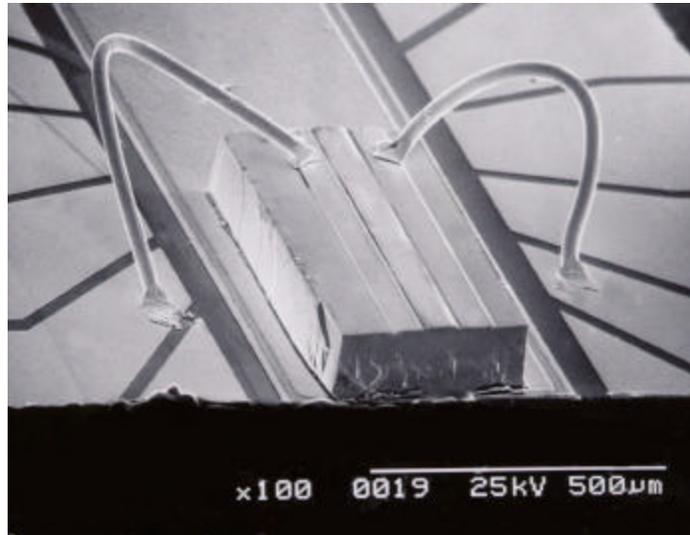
SEM of a processed and packaged ridge laser and monolithically integrated cooler. The laser was mounted at the edge of a cleaved Si package to allow for coupling to a fiber probe. The wire bond for the center stripe p -contact is not shown.
